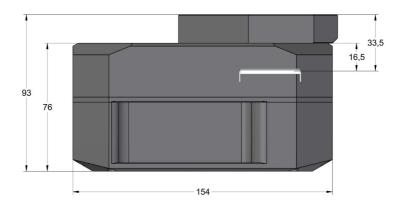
G4 camera head with Enhanced cooling side view dimensions
